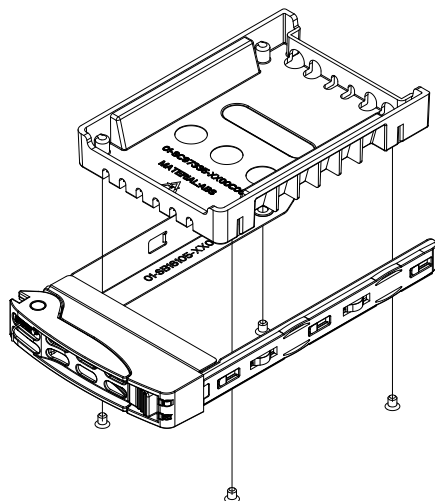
Removing a Dummy Drive from the Drive Carrier
